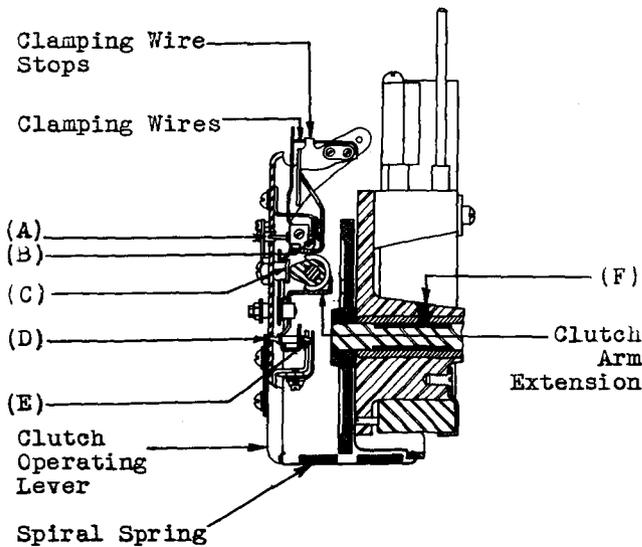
Cross Section of Balancing Mechanism and Clutch
